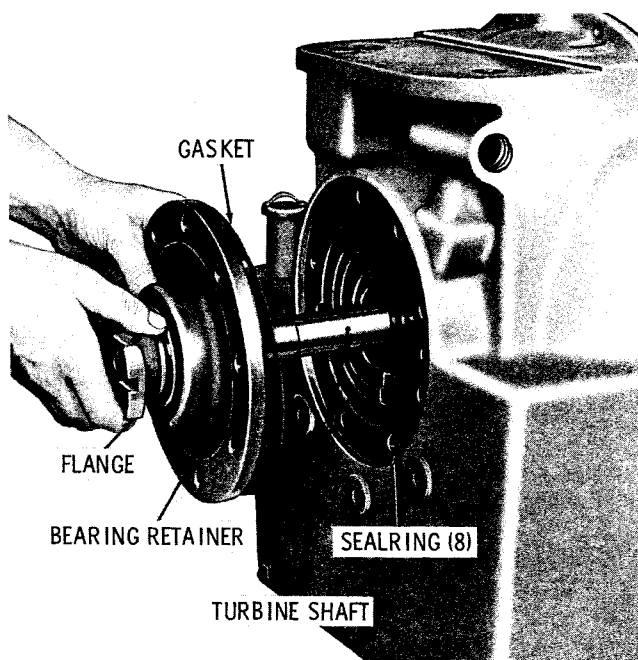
Installing automotive shaft assembly (TC 300)
